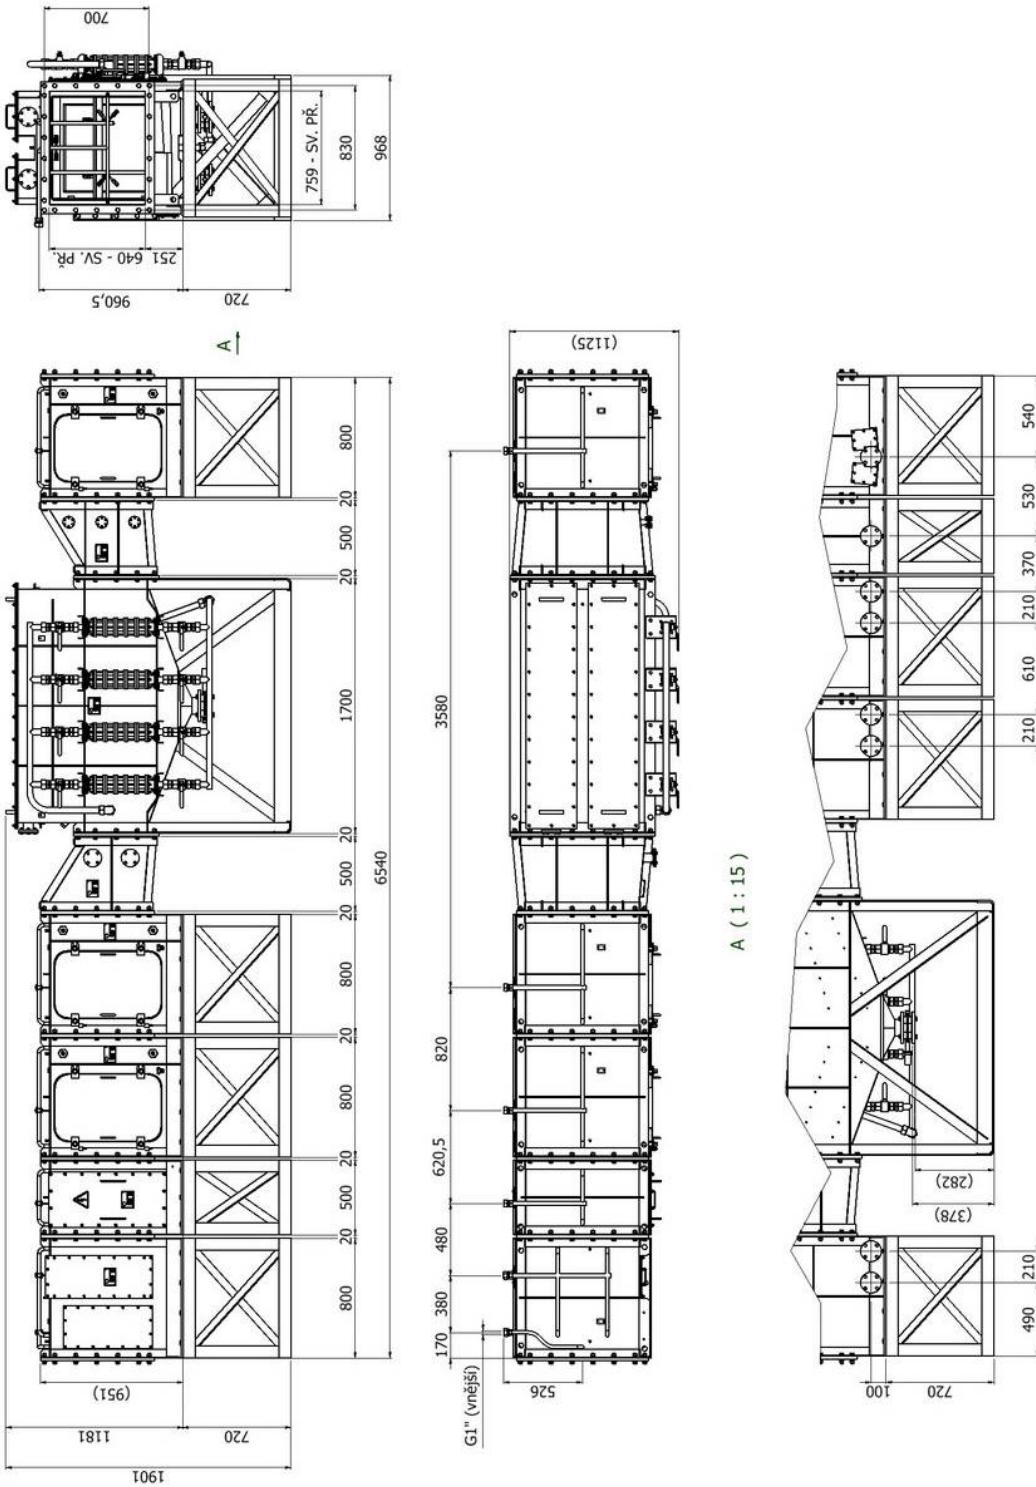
Main dimensions of the filter unit 2, solid right-hand model
